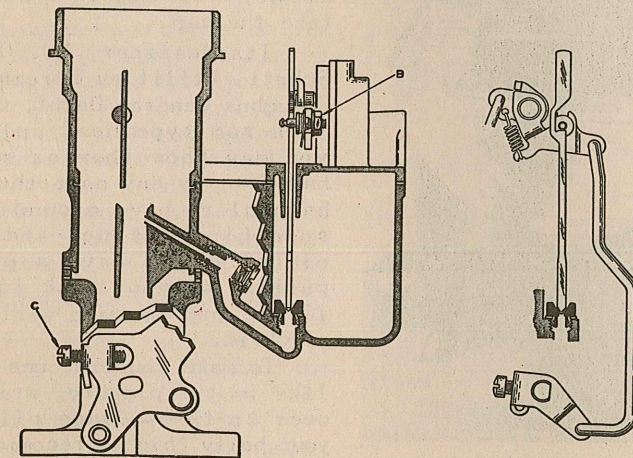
METERING ROD GAGING - Remove the metering rod and install the gage. Loosen nut 'B' and move the pin until it slips into the notch in the gage.
